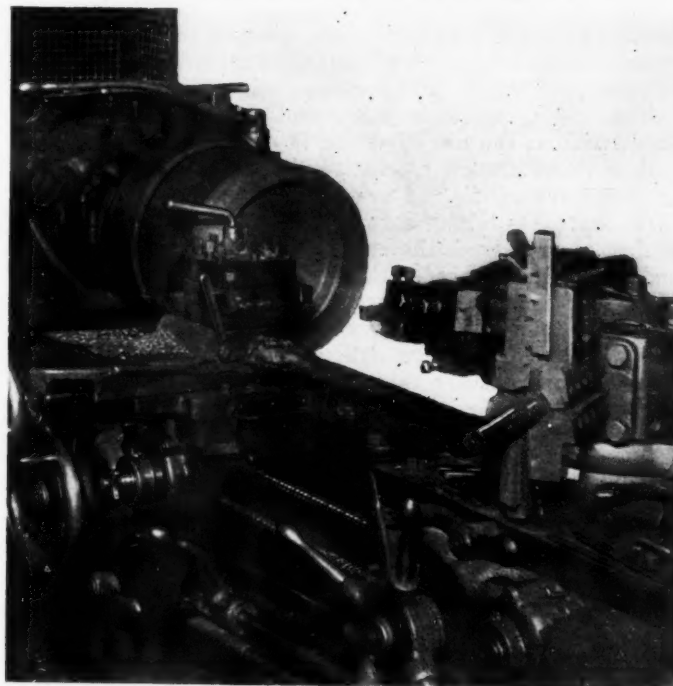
Lathes doing the finish-cutting work on the flywheel, which is one of several machine jobs on this part
